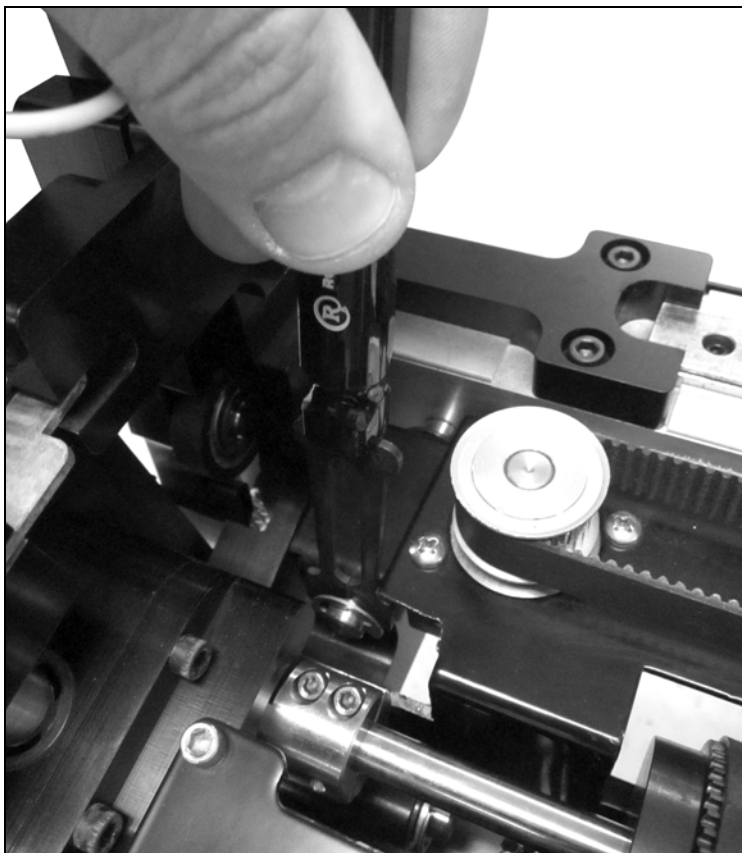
Install the retaining ring (external retaining ring installation tool shown).
